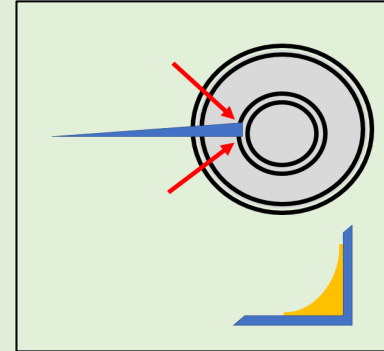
Epoxy Fillet to Seam Motor Mount and Tang
